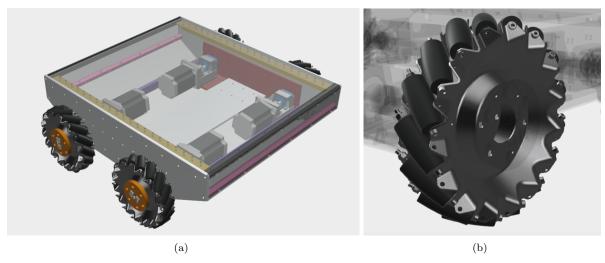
(a) Mecanum wheeled mobile robot (b) Mecanum wheel [6]
